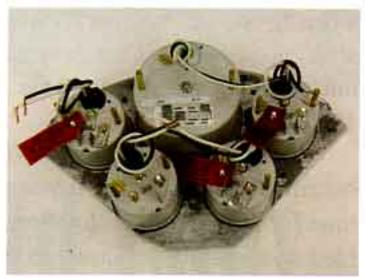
& 1b: Place the front face of the gauge panel face down on a soft surface and place the gauges face down in the panel. We chose to install the oil and water gauges in the two upper holes and the fuel and volts in the two lower holes.
